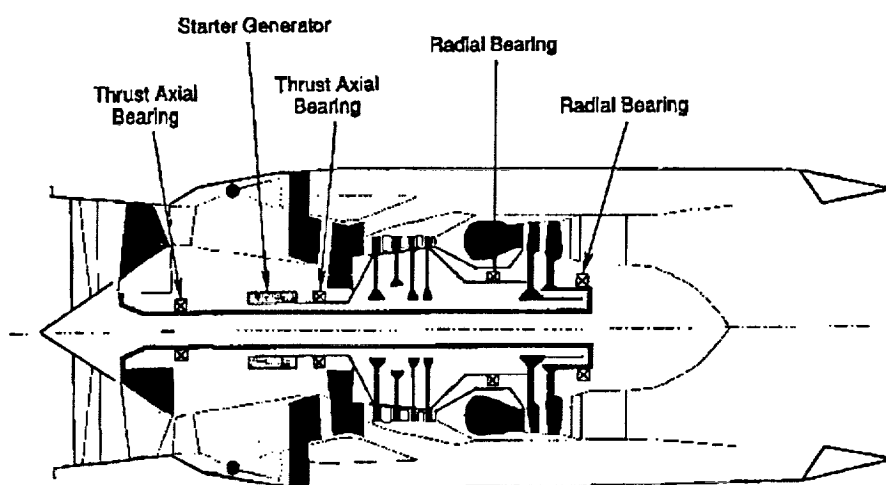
Advanced Four Bearing Turbofan Engine with Magnetic Bearings and Integral Starter/Generator
